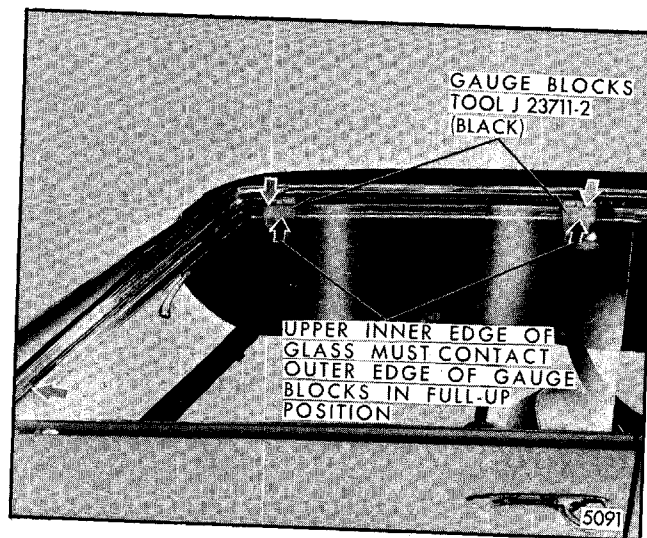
Door Window - In and Out and Up-Travel Alignment - "E" Styles
